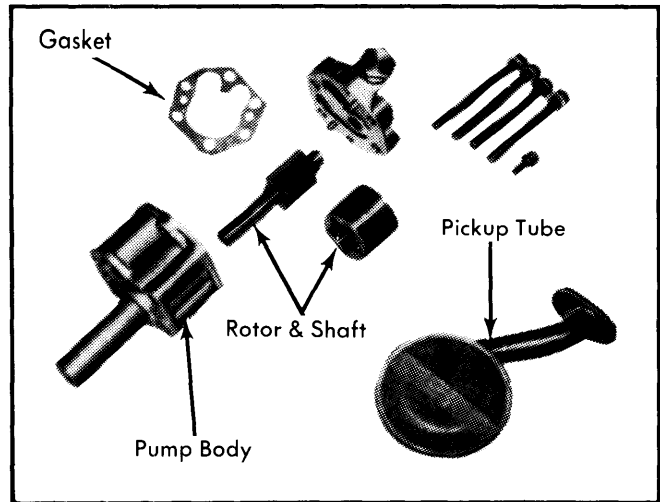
Exploded View of Oil Pump & Pickup Tube
